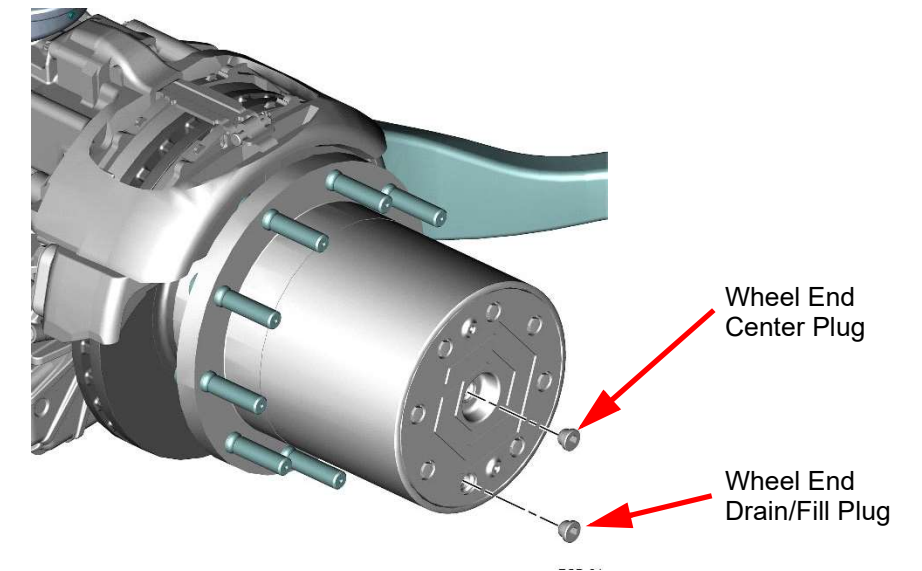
Removing Wheel End Drain/Fill Plug and Center Plug
